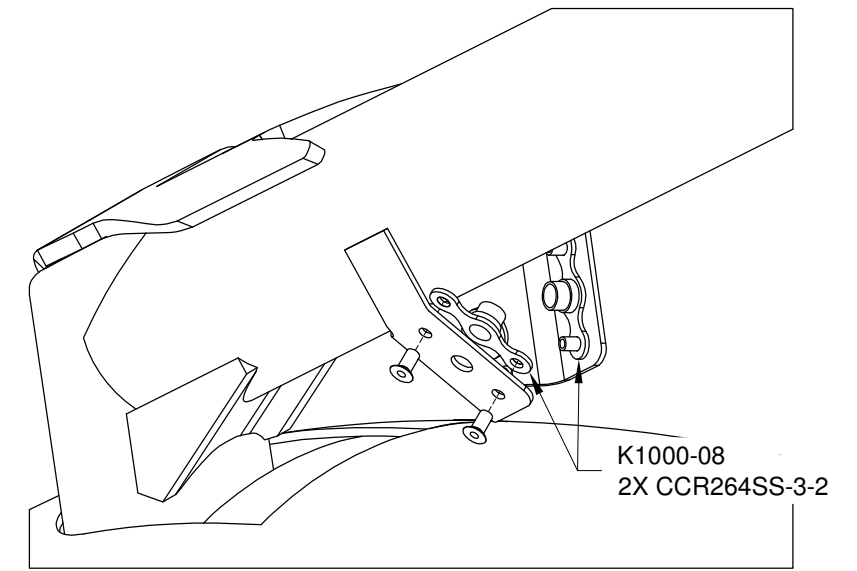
RIVETING NUTPLATES TO THE NOSE GEAR LEG ASSEMBLY
